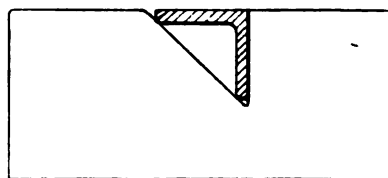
Angle laid in Vee Block for Marking Rivet Holes.
